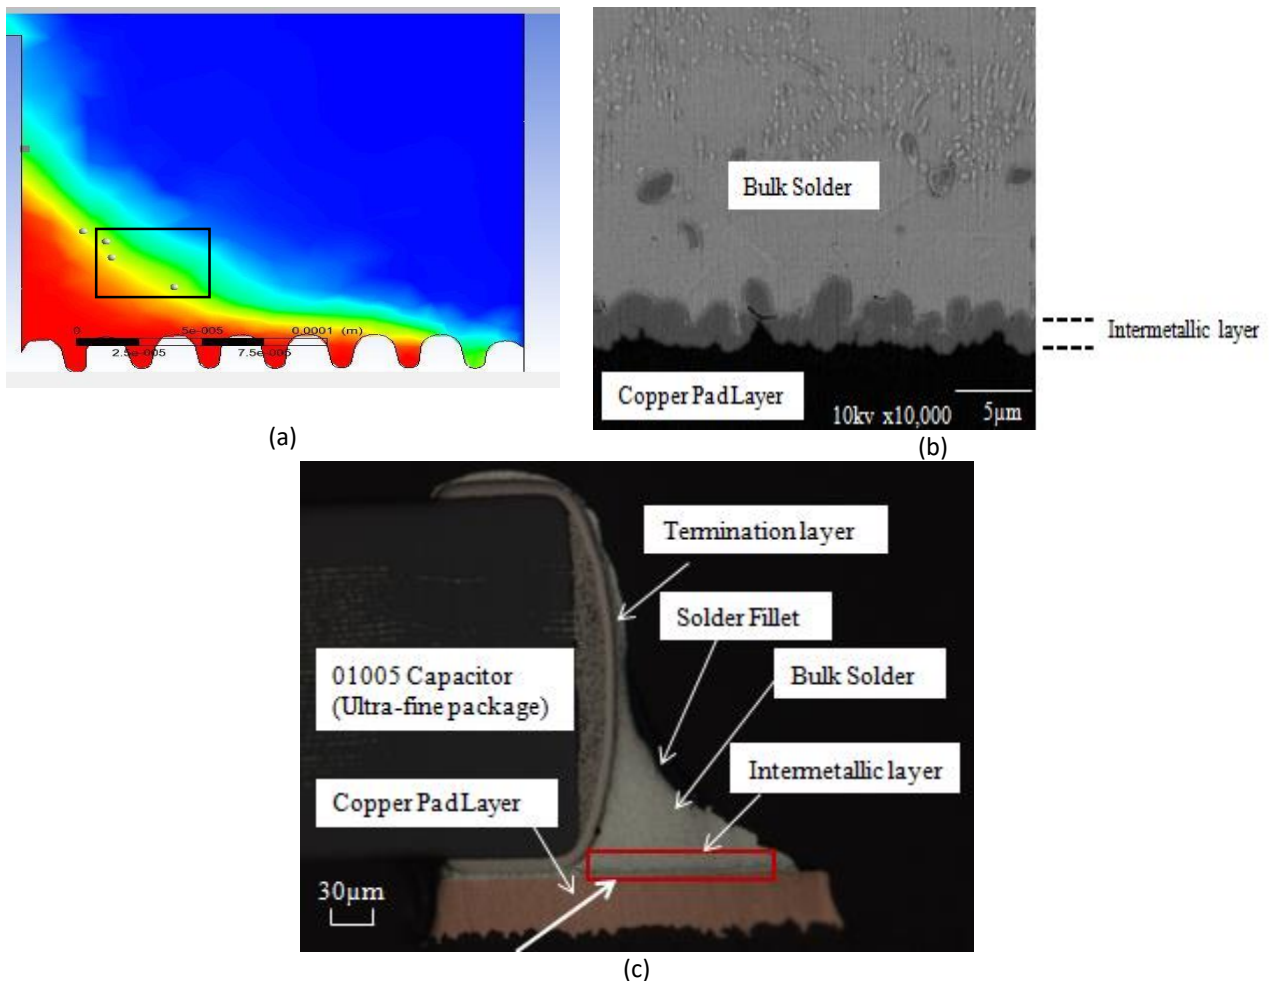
(a) Fillet observation from the study (b) IMC layer measurement region (c) IMC layer with solder fillet [23]
